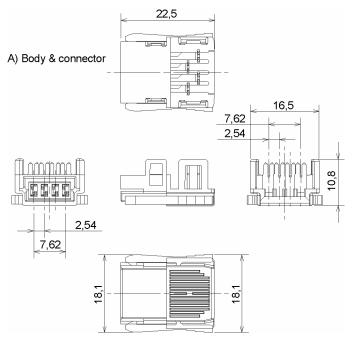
PhL-P flat cable connector and terminal cover – body and connector
